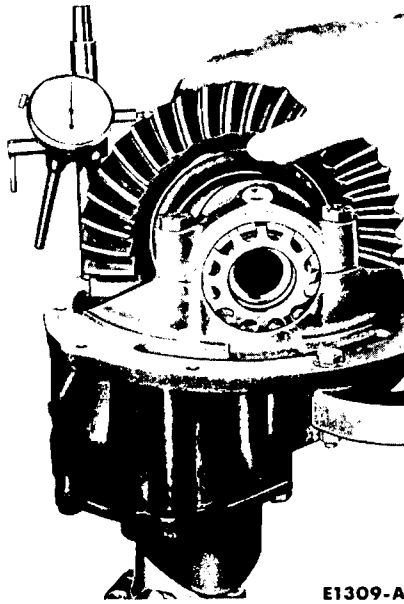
Checking Backlash—Removable Carrier Type Axle
